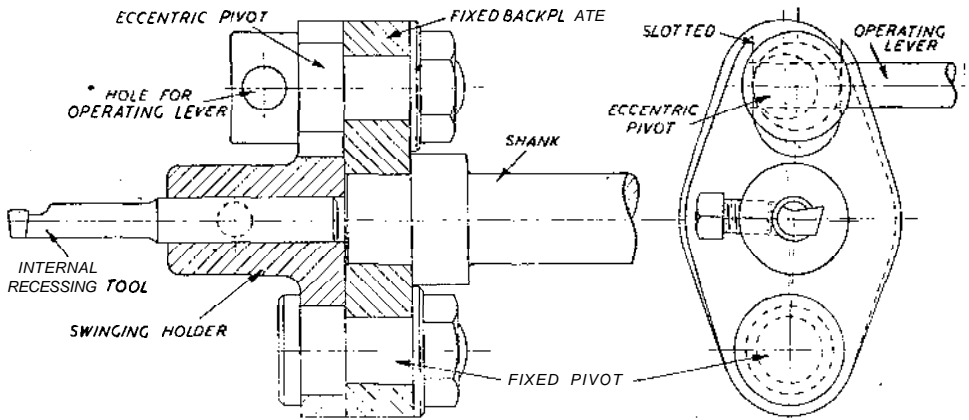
A boring tool holder with side swing movement, for internal recessing or chambering operations.
